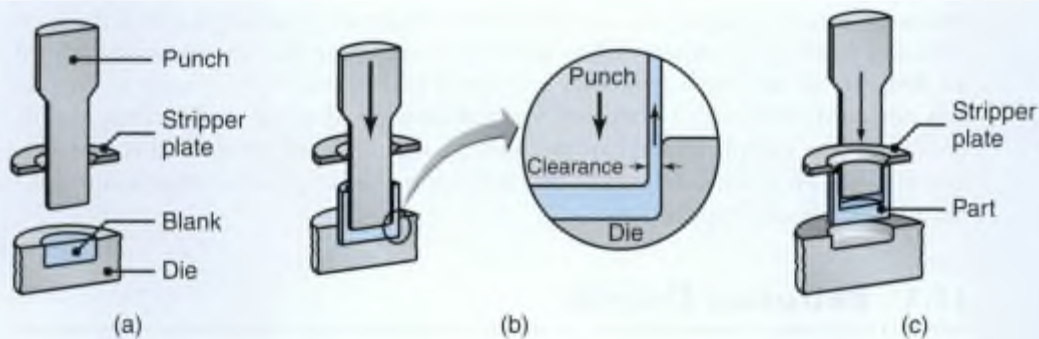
Schematic illustration of the impact-extrusion process; the extruded parts are stripped by using a stripper plate.
